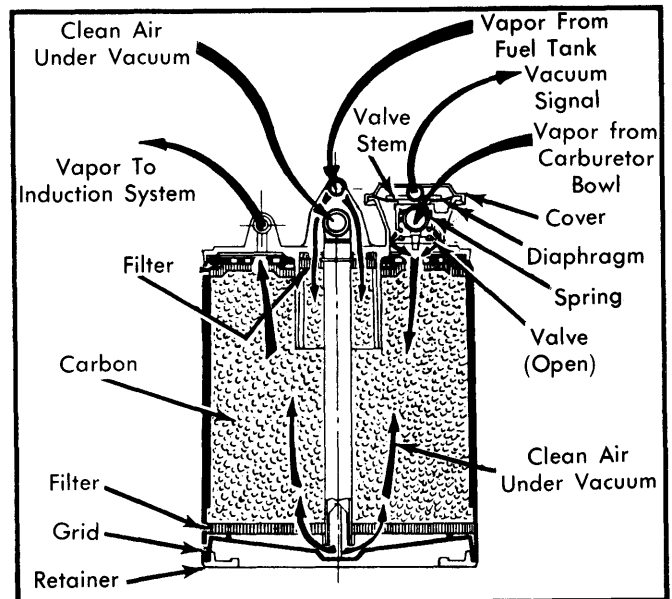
Cutaway View of Carbon Canister With Vapor Vent Valve
